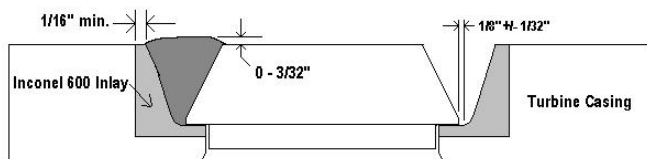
TURBINE CASING / PLUG WELD ARRANGEMENT
